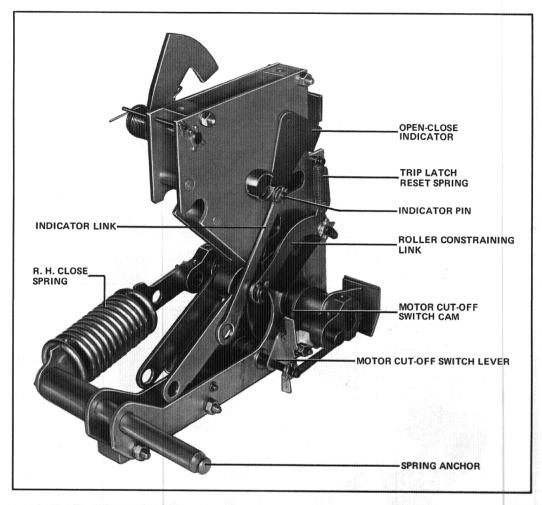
Rear View of Mechanism (Left Close Spring Removed)
